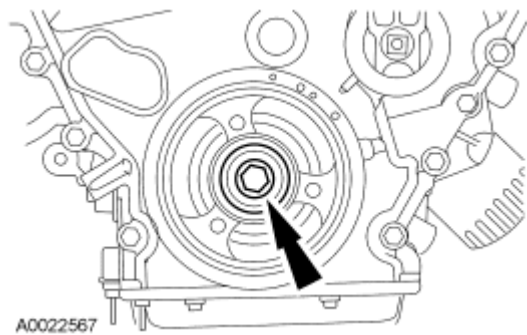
Locating Crankshaft Vibration Damper Washer & Bolt
